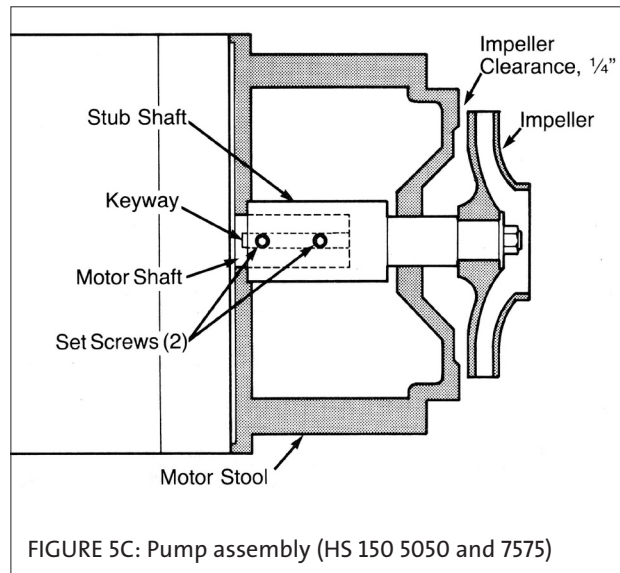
C: Pump assembly (HS 150 5050 and 7575)
